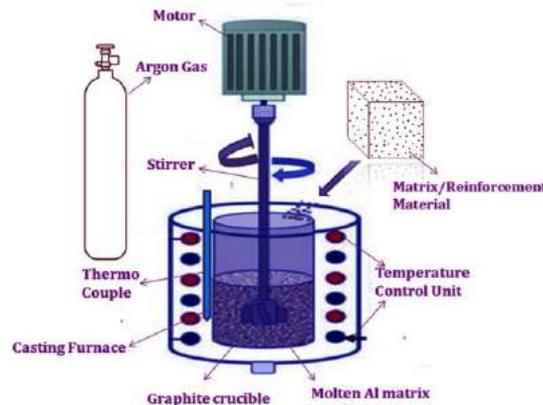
Modified gas injection ultrasonic probe double-stir casting
